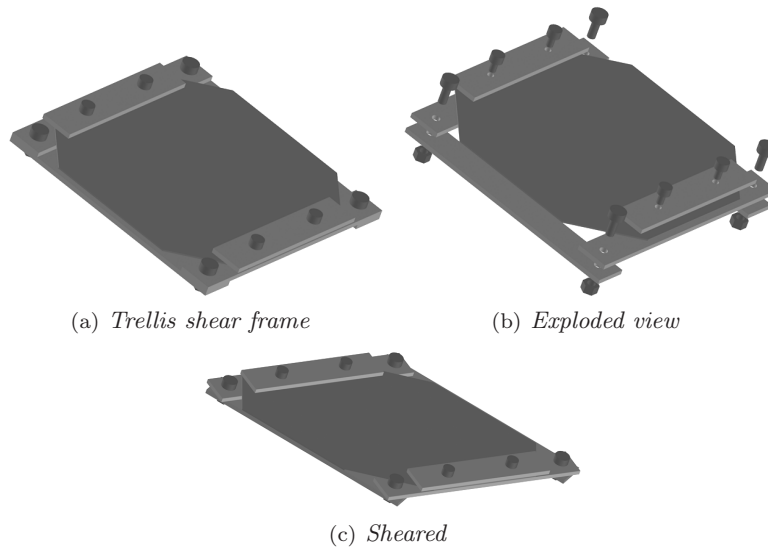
Small trellis shear frame used to shear the specimens.
